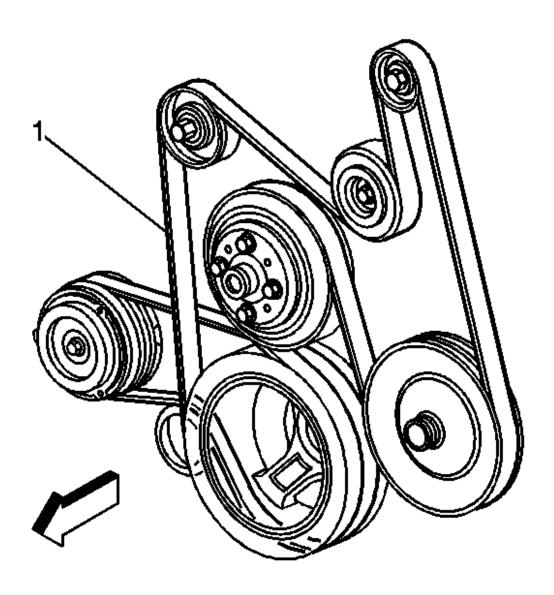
View Of Accessory Drive Belt Routing Courtesy of GENERAL MOTORS CORP.
